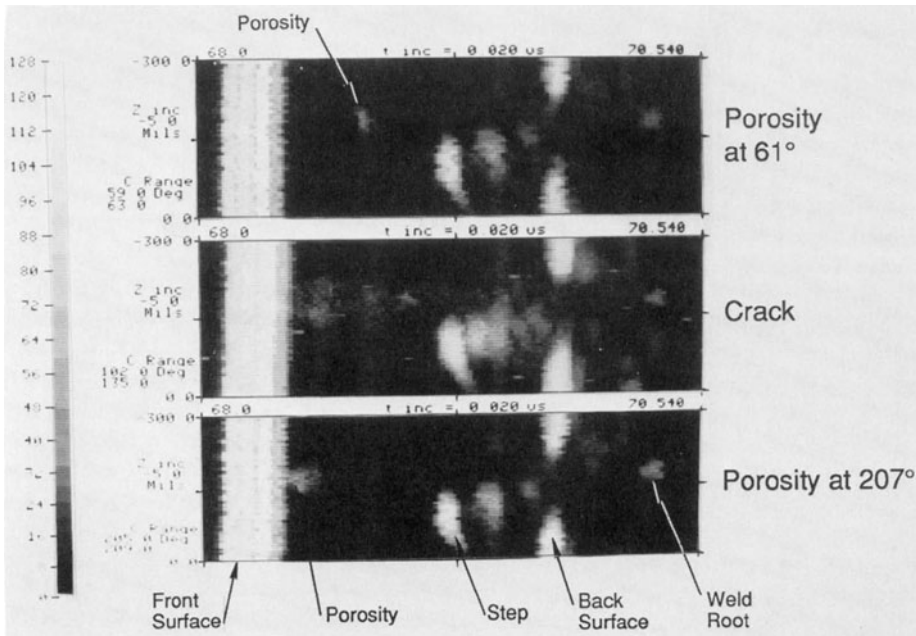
Longitudinal Axial B-Scans of Cracked Weld.
